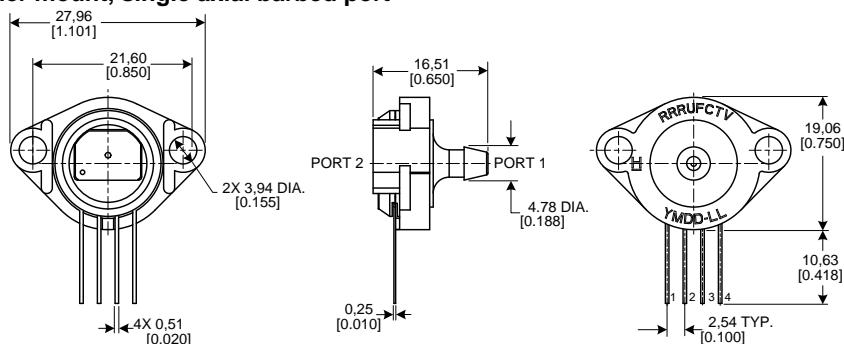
SIP Package Dimensional Drawings (For reference only: mm [in])
